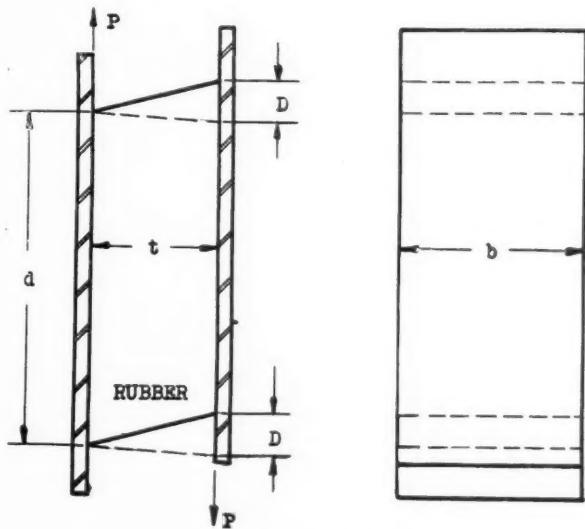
Shear-Type Rubber Spring. The Unstressed Rubber Section Is a Parallelogram
